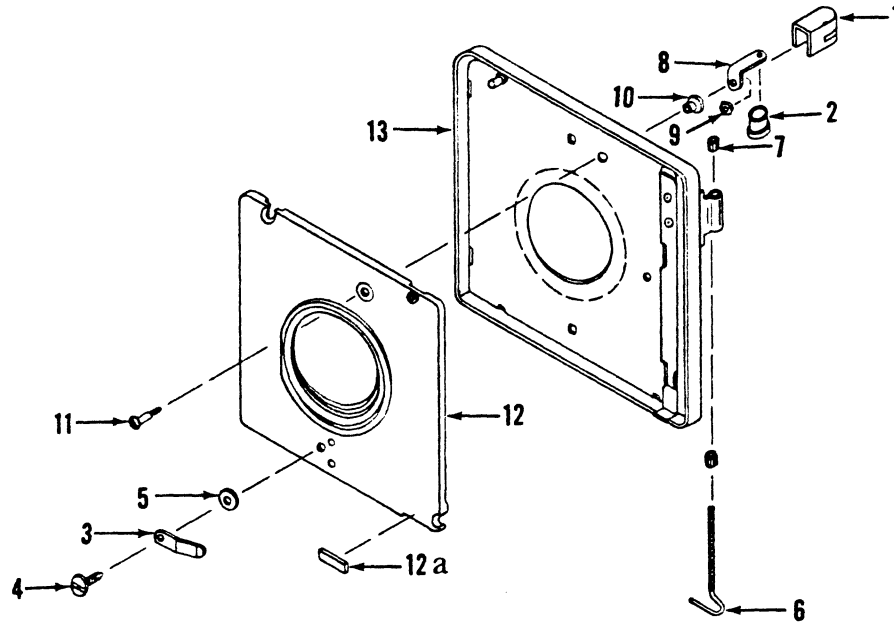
LENSBOARD COMPLETE FOR #1 GRAPHIC SYNCHRO-COMPUR SHUTTER w/ASA Bayonet Flash Fitting
